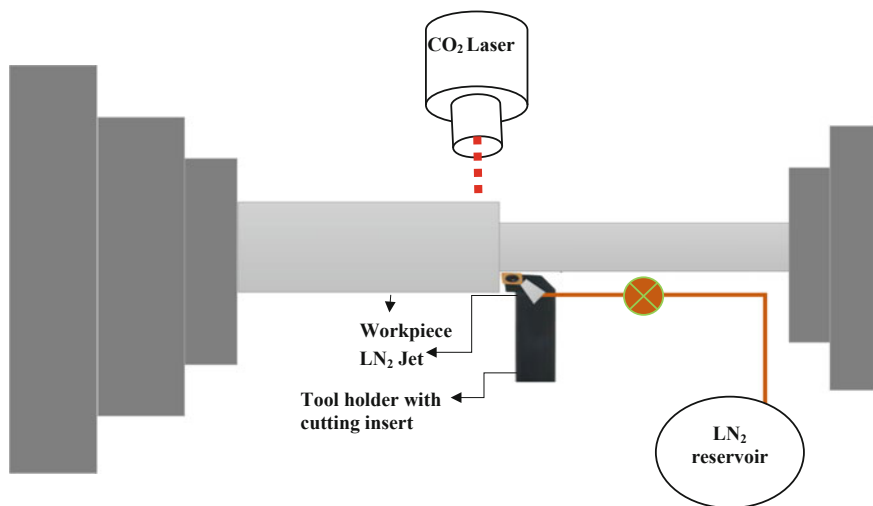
Hybrid model (laser assistance + cryogenic cooling) based machining
